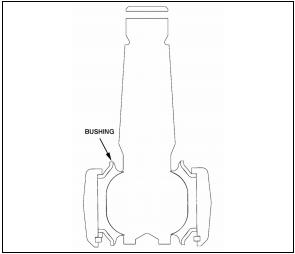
LOWER A-ARM CENTRAL BALL JOINT 16113
